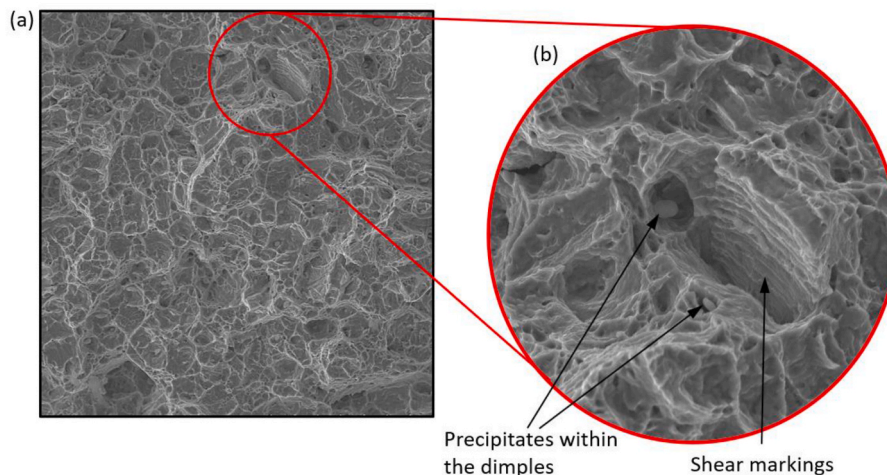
Fracture surface after tensile testing inspected by SEM: a) Overall Overview and b) detailed view of the fracture surface.
